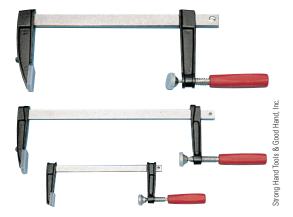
Bar clamps can be opened wider than most C-clamps to be used on larger weldments.
